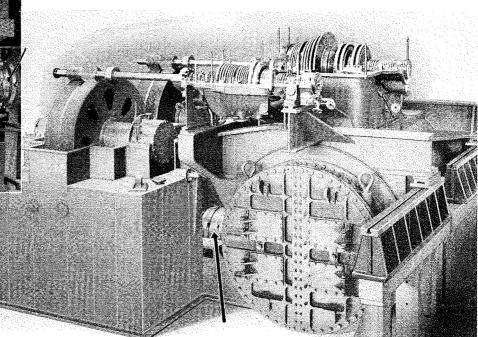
Steam propulsion unit, con-sisting of high and low pres-sure turbines, condenser, and reduction gears with six-shoe thrust bearing at forward end of main gears and thrust bearing, looking down.
